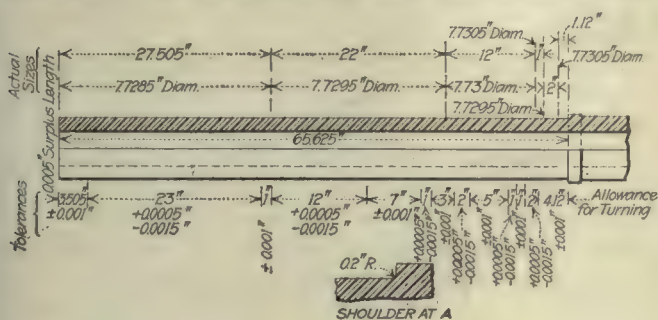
SHRINKING DIMENSIONS FOR THE JACKET
